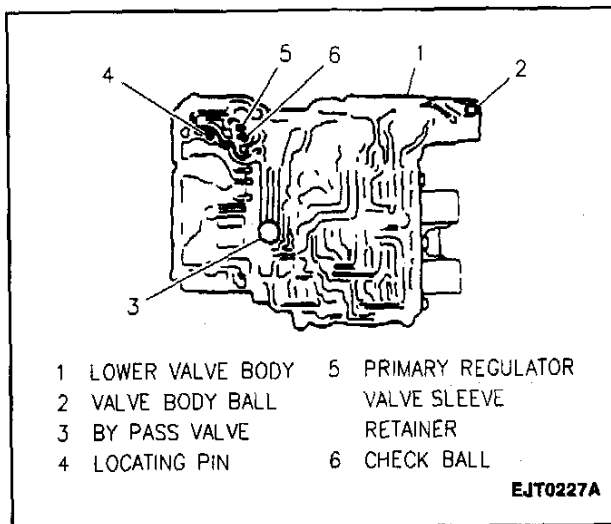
Bypass Valve, Valve Spring, Check Ball, Valve Damping Spring, Valve Body Ball and Ball Valve Spring Location (03-72LE, 4-Speed)
